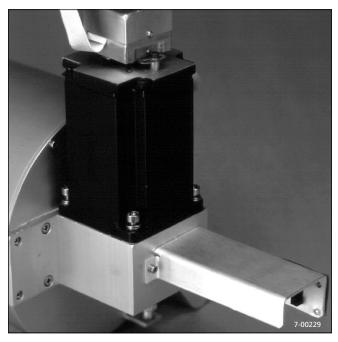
Gear mesh procedure: Fasteners installed but not locked
